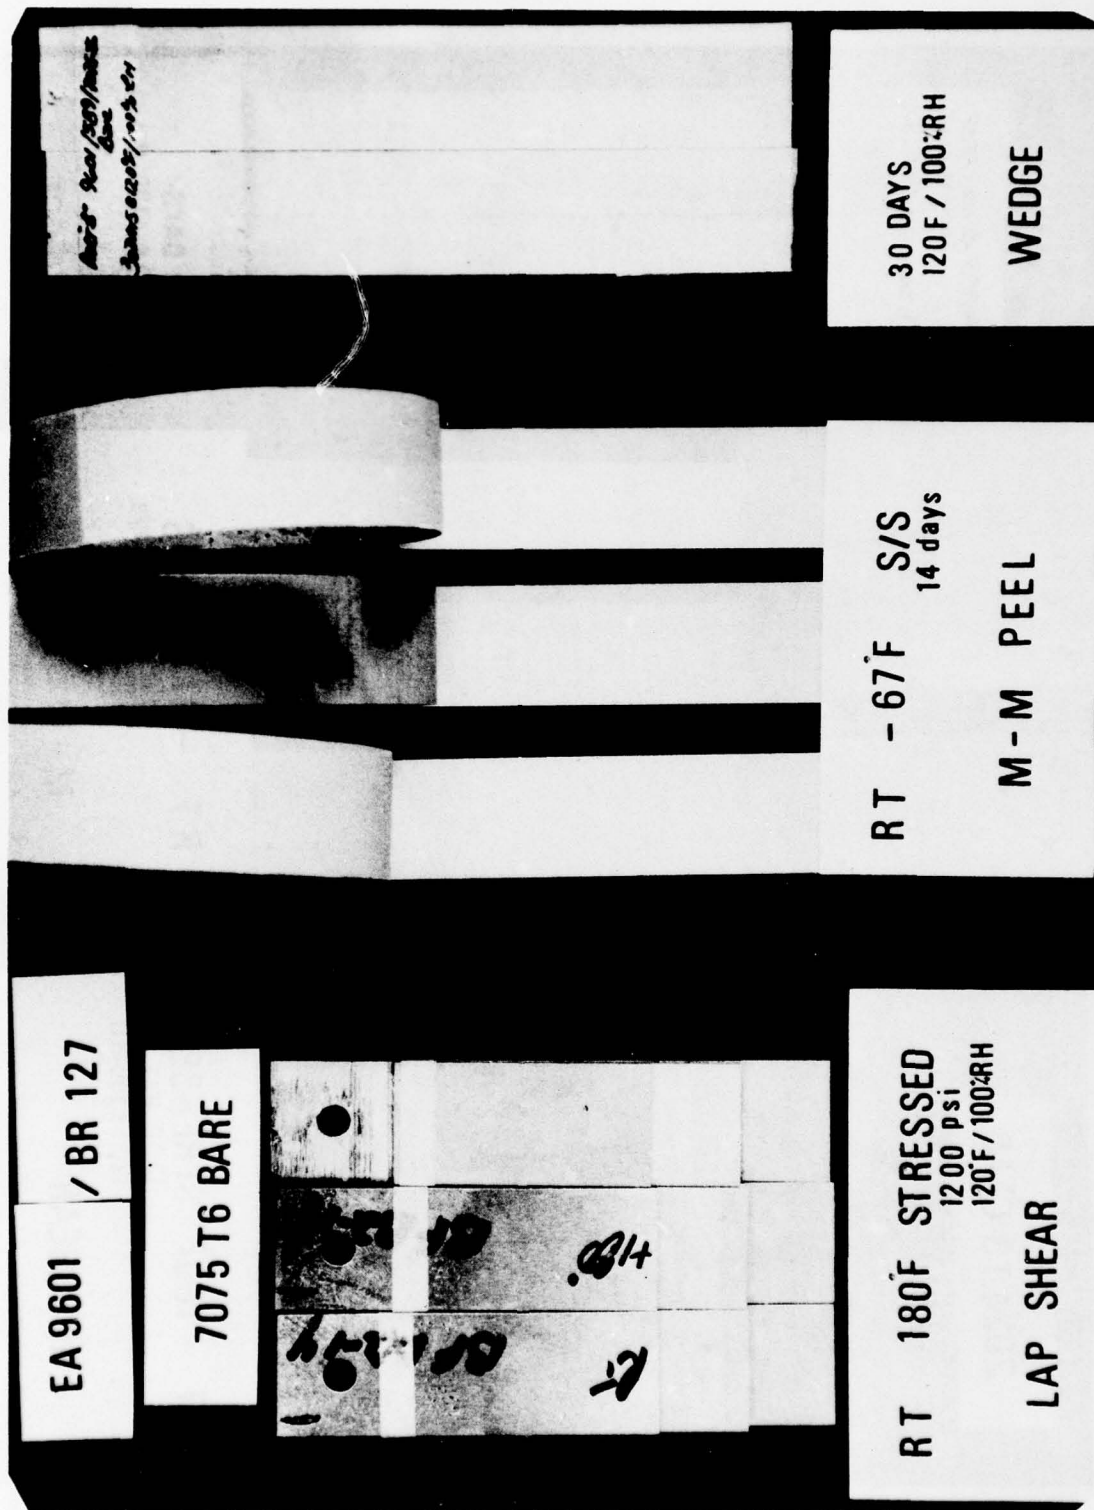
Specimen Bond Surfaces -- EA 9601, 7075-T6 Bare
